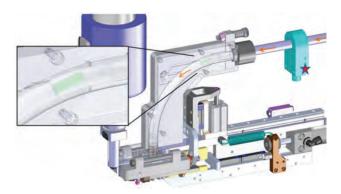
Backwards Fastener Trips Tube Sensor and Enters Chamber
